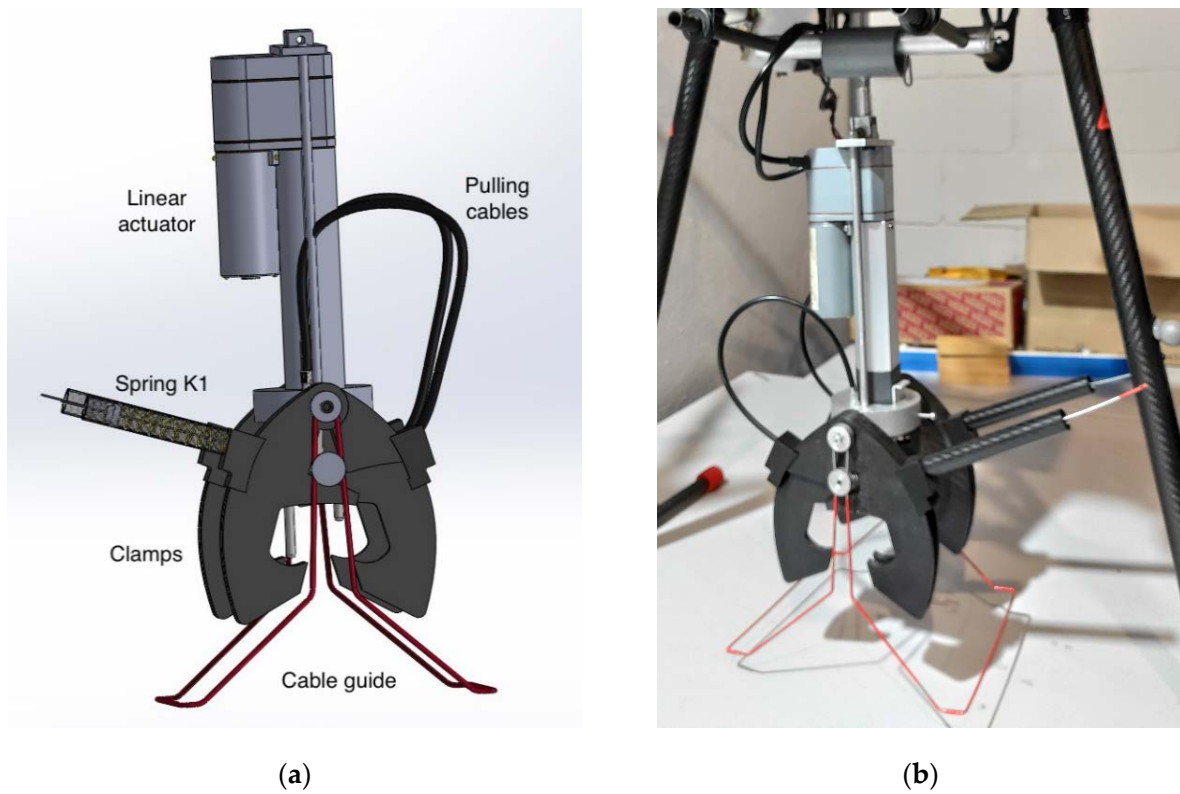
(a) Design of the diverter installation tool and (b) the current prototype developed.
